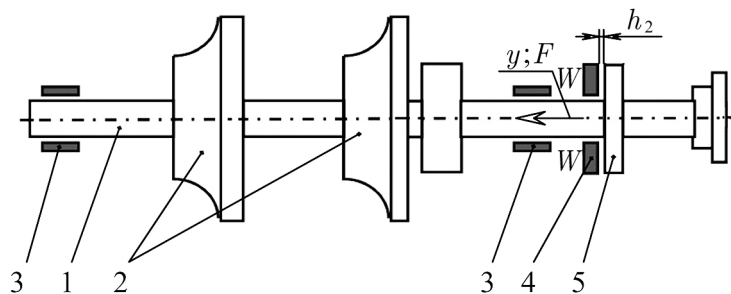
Scheme of the rotary part of a centrifugal compressor: 1 — shaft; 2 — working stage; 3, 4 — fluid film journal and thrust bearings; 5 — collar;  $h_2$  — working clearance of the thrust bearing
